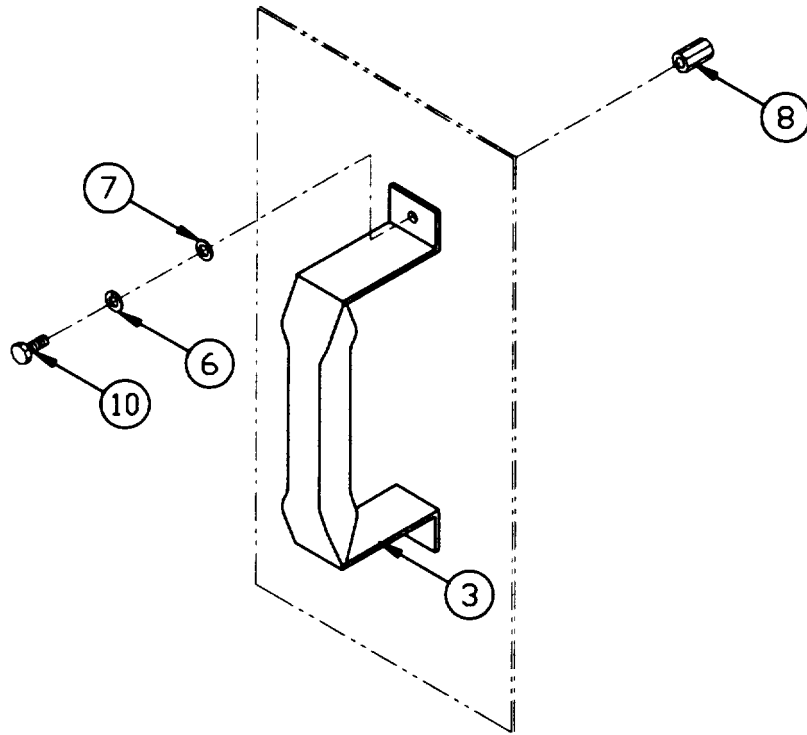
AFT END ASSEMBLY (SHEET 1 OF 5)
